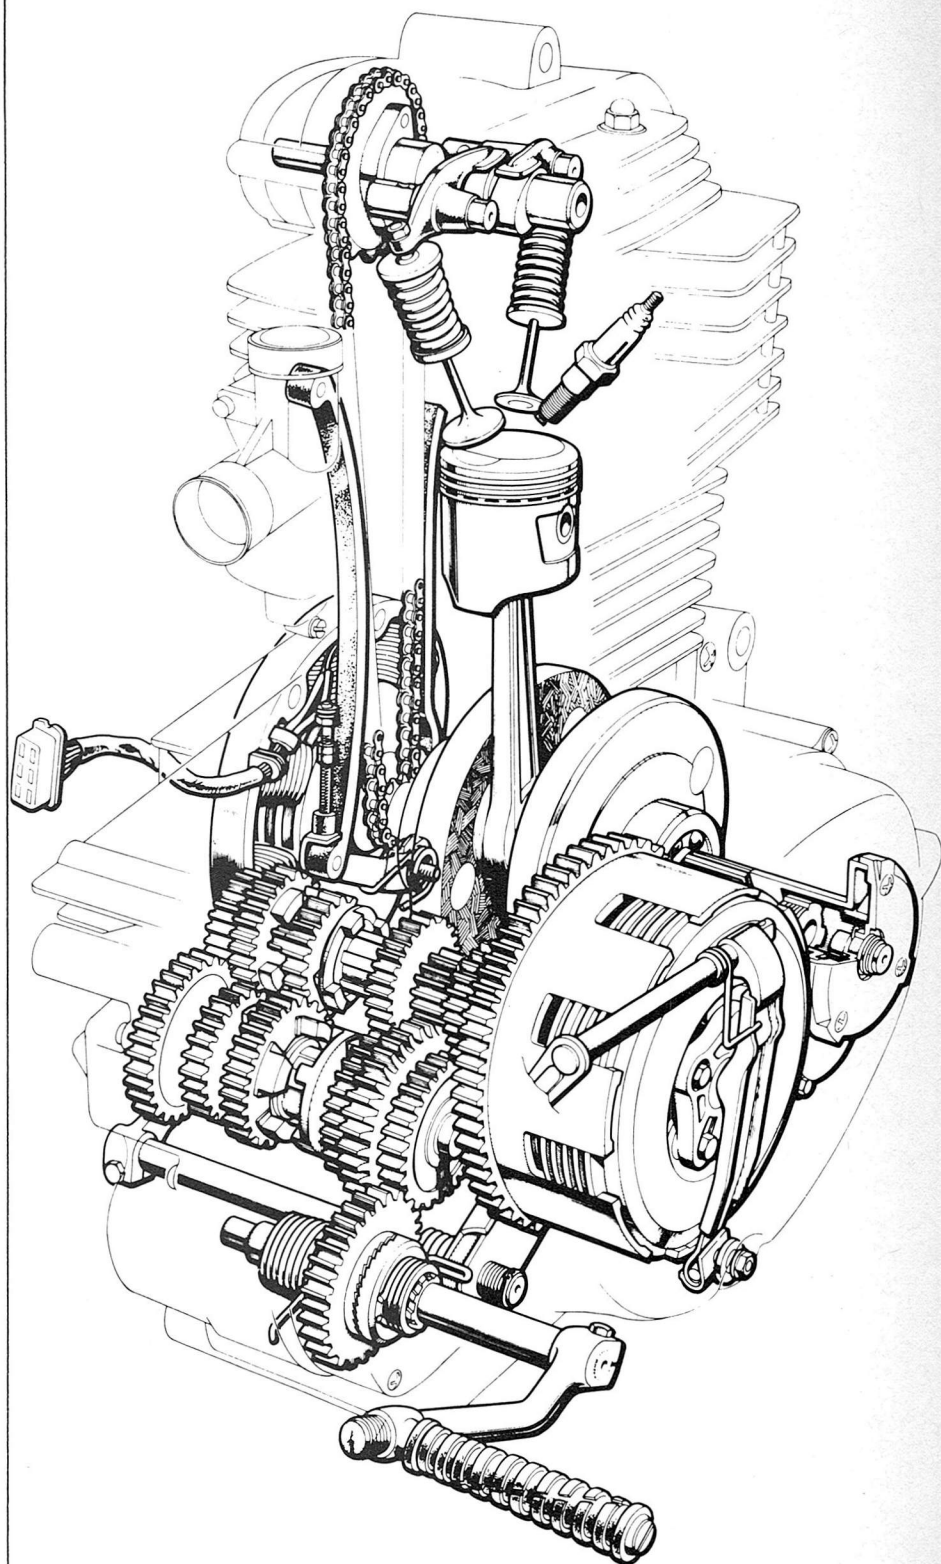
This chain-driven single overhead cam arrangement is used on some models of Honda motorcycles. Conventional coil springs hold the valves closed. Valve-lash adjustment is by the screws on the valve end of the rocker arms.
